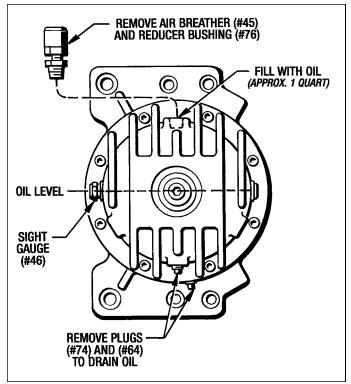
Lubrication - Horizontal Brake (MB-210-494)
